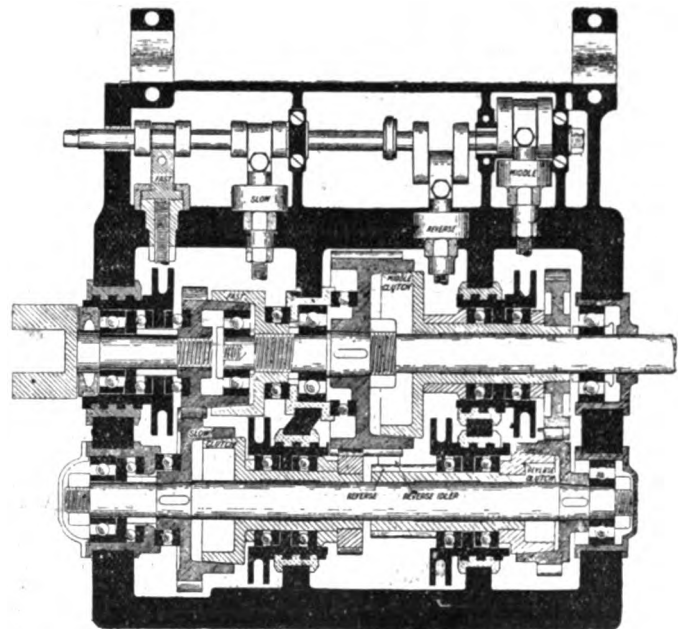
Sectional Plan View of the Wicksteed Change Speed Gear.
